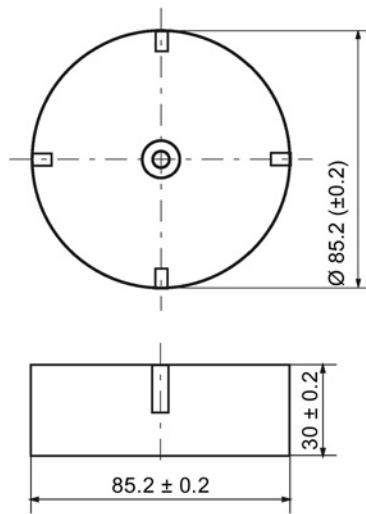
Dimension drawing of spacer 6GT2690-0AA00
